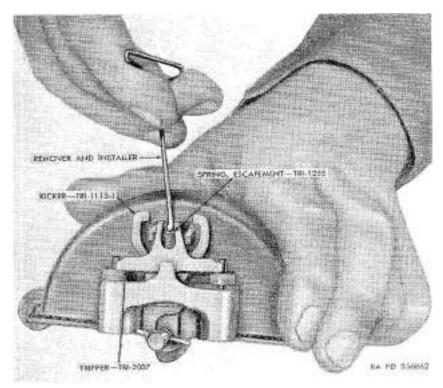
Removing and installing escapement spring with remover installer from kit = 41-K-280.
